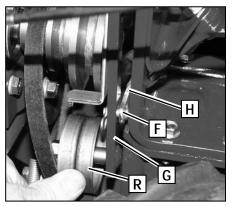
Remove clevis pin from outer hole in forward adjustable link and move to inner hole in link.
